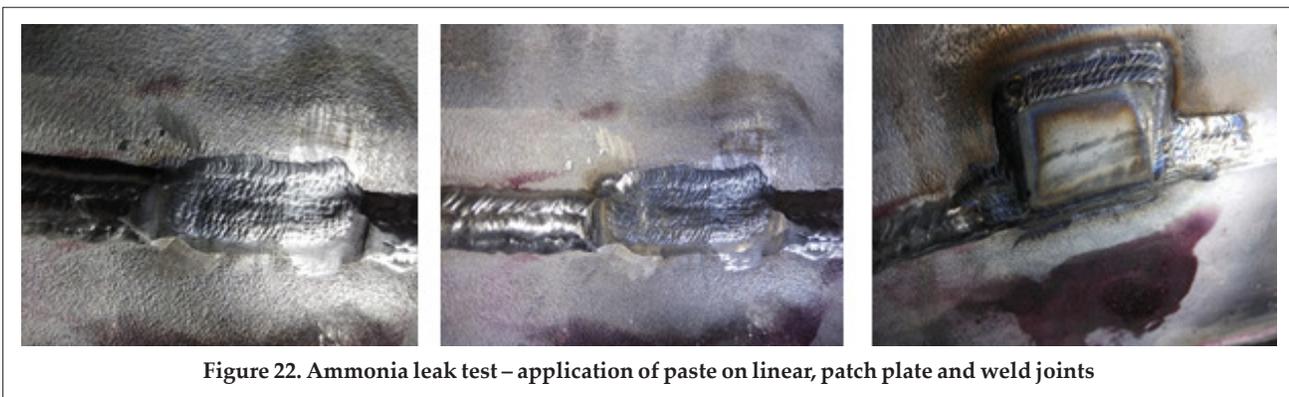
Ammonia leak test – application of paste on linear, patch plate and weld joints
